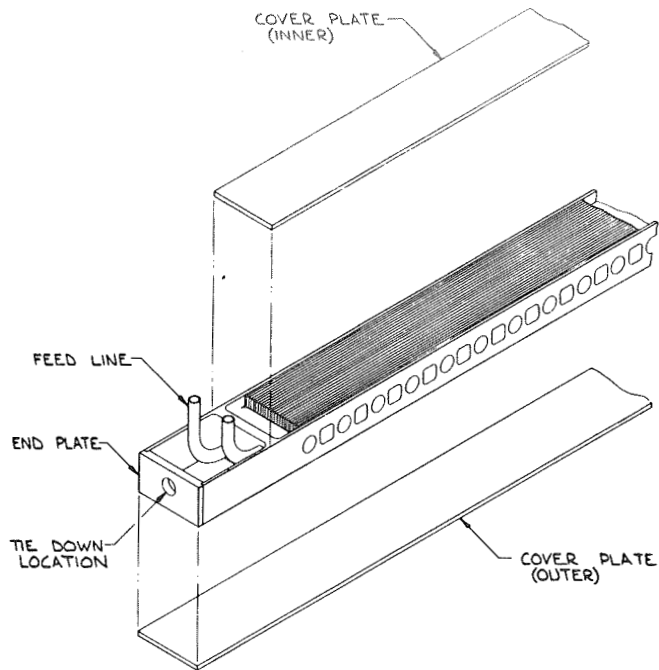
Vapor Chamber Fin Radiator Assembly Sequence Step 3
